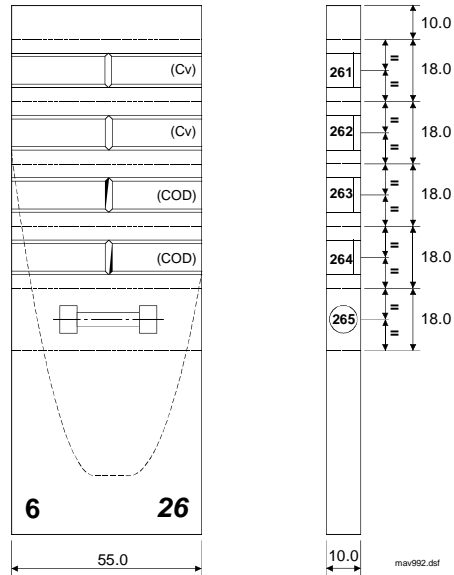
The T-L specimen orientation in the weld. The CH-V specimens of all sizes, tensile specimens and CH size fracture toughness specimens had this orientation.
